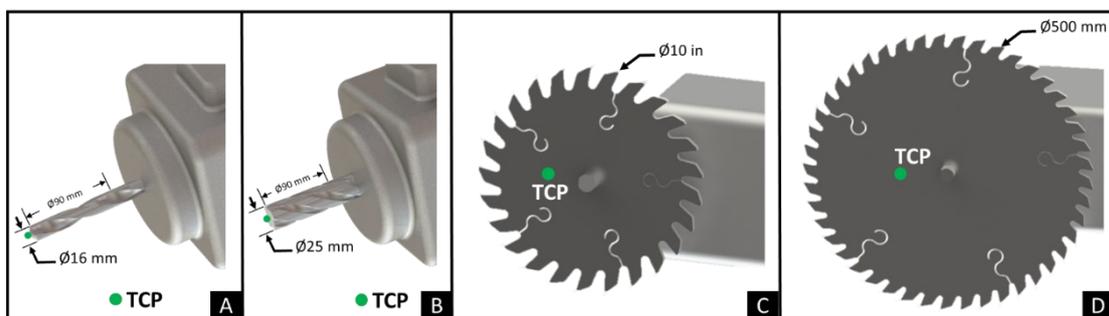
Tools considered in the algorithm. A) drill bit of 16 mm of diameter, B) end mill with 25 millimeters of diameter, C) circular saw with 10 inches of diameter, and D) circular saw with 500 millimeters of diameter.
